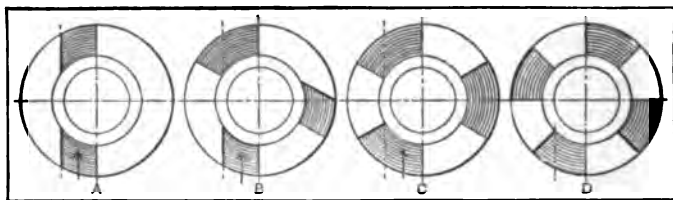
Diagrammatical Views showing Simple Method of Cutting Clutch Teeth
